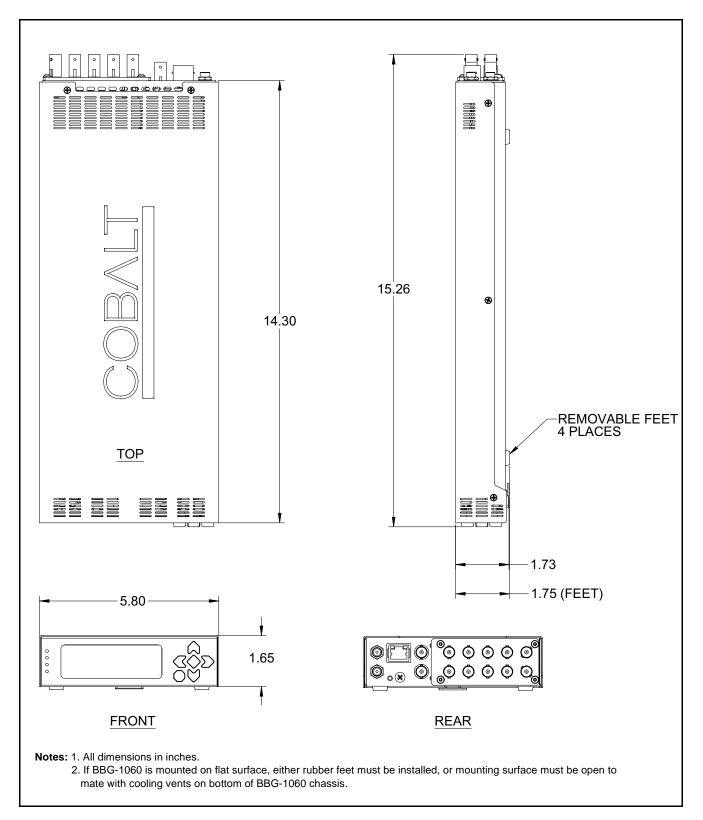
BBG-1060-TG2-REF1 Dimensional Details
